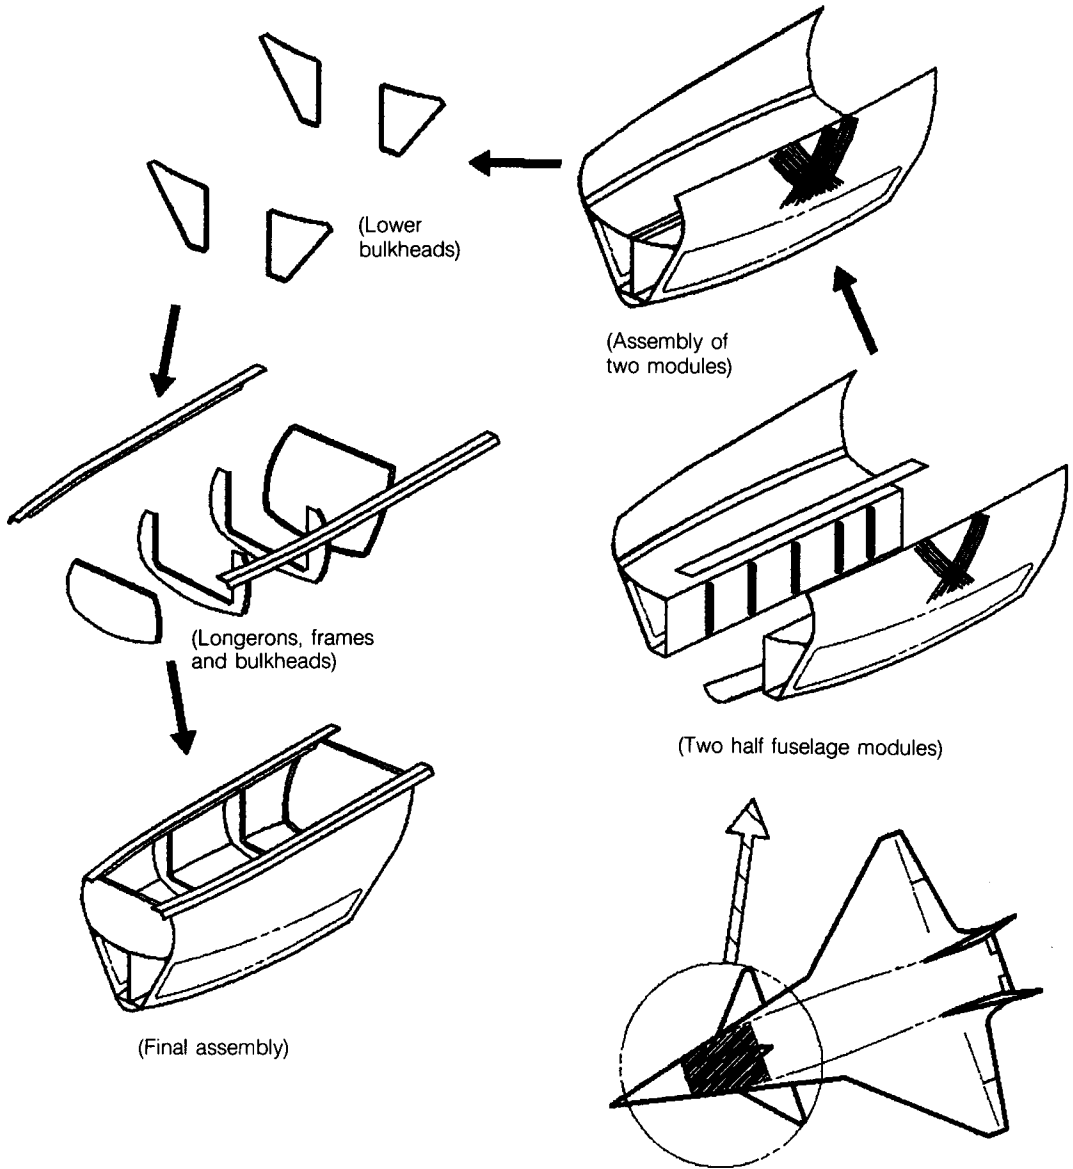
illustrates a fighter fuselage modular design and Fig. 12.3.2 illustrates transport fuselage modular design; both concepts are assembled together by bonding (thermosets) or dual-resin bonding (thermoplastics) or another similar joining method. Design considerations for the modular concept are listed below:
